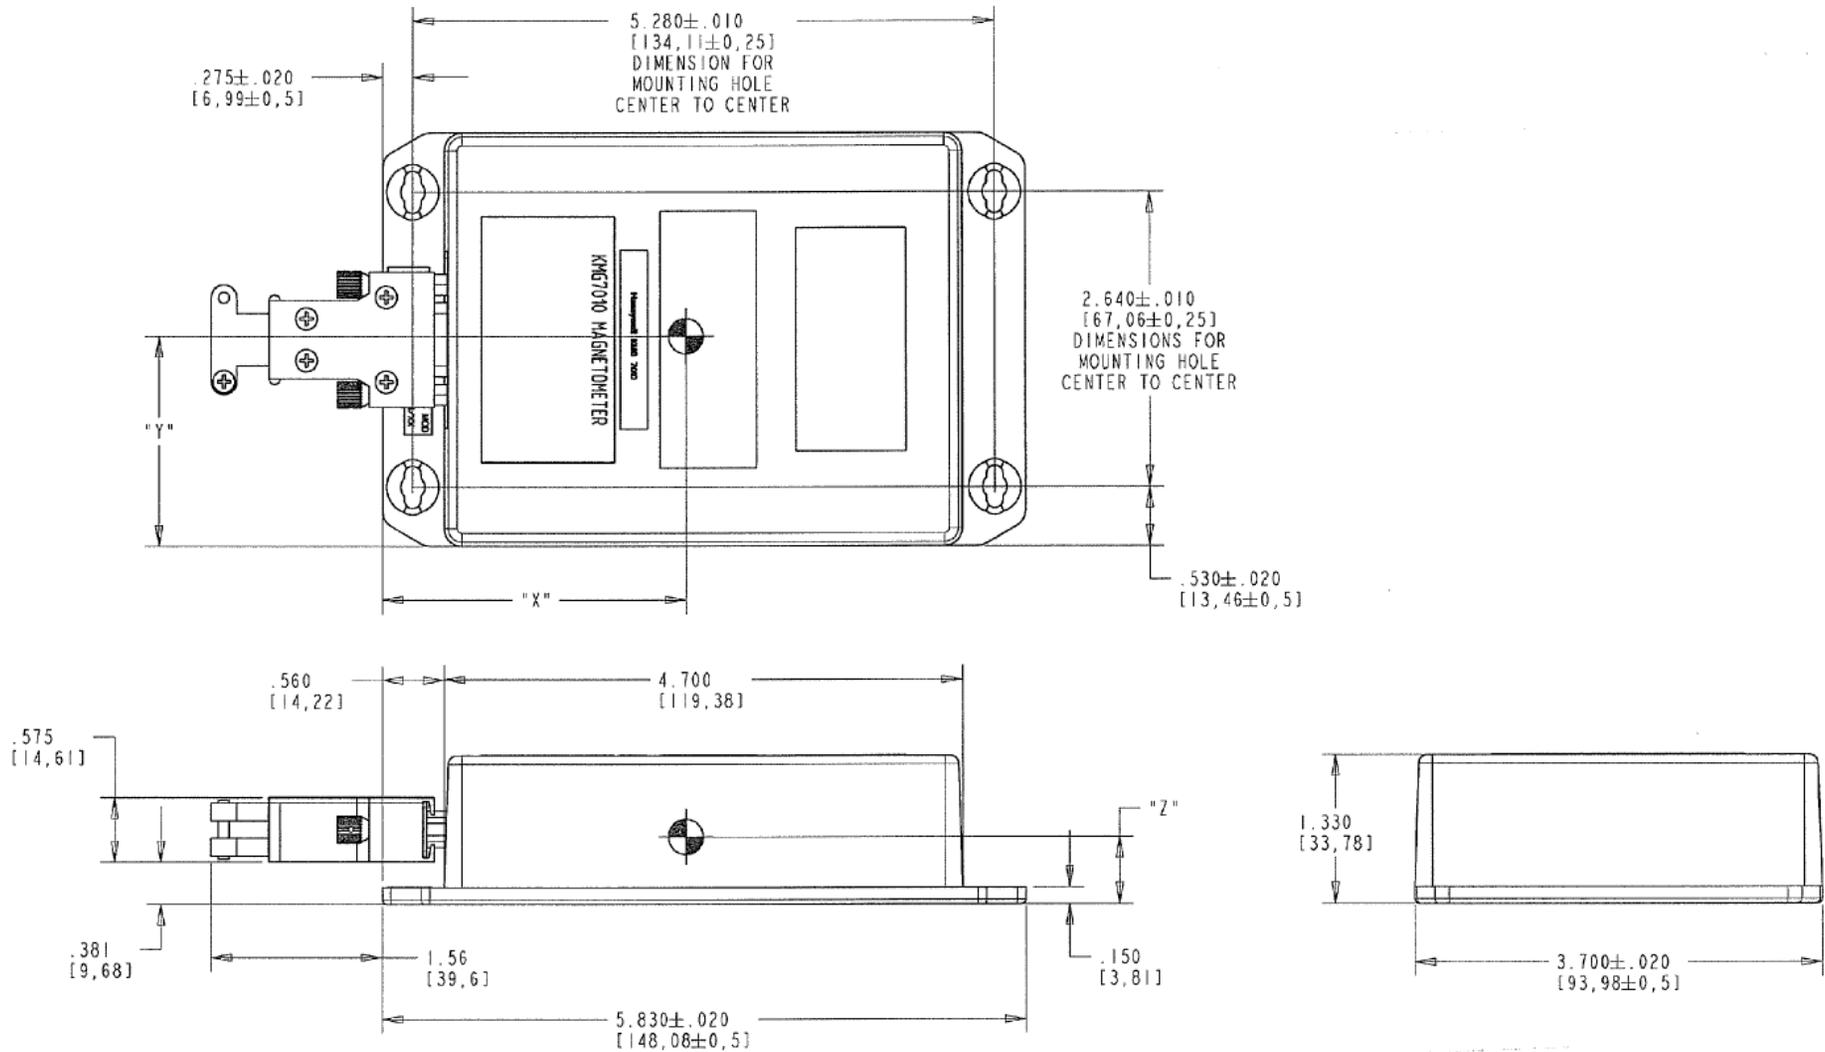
KMG 7010 Outline and Mounting Drawing (Sheet 1 of 2)
